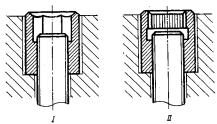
Nuts with hexagon socket (I) and serrated socket (II)
